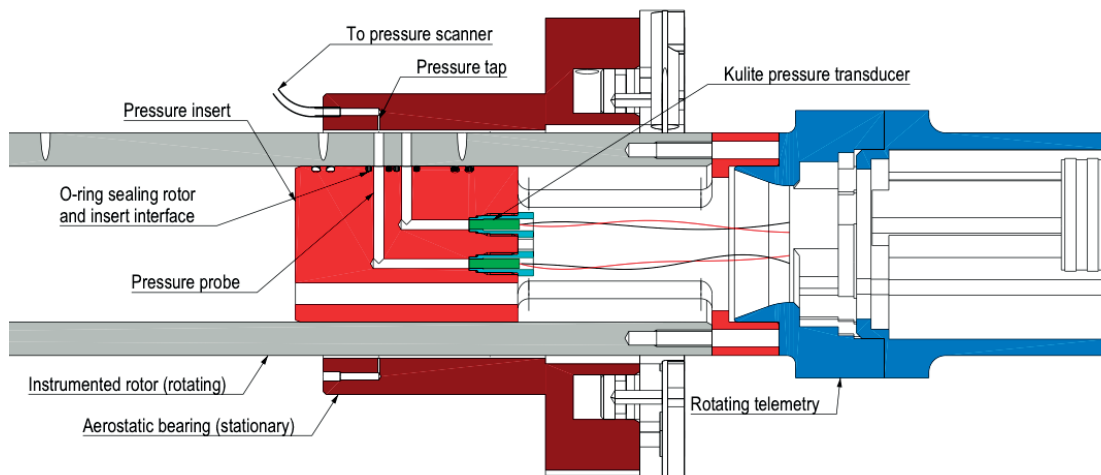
The test externally pressurized bearing with pressure taps at the same plane as one of the rotating embedded probe. The instrumented rotor is moved axially in order to compare the other embedded probes with the bearing pressure taps.
